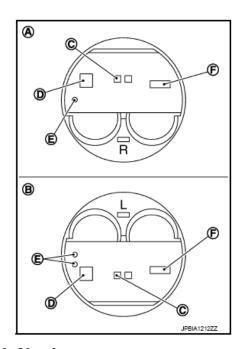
Identifying Piston And Piston Pin Grade Numbers
